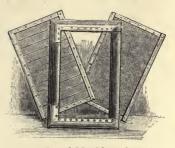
Hand Moulds and Deckle (Laid and Wove Moulds).
